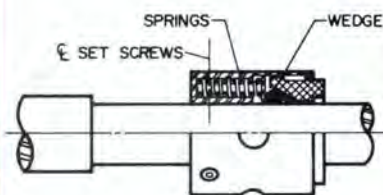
Pusher type mechanical seal with conical wedge secondary shaft seal.
